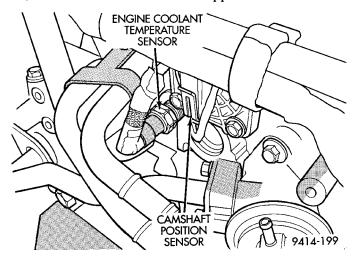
Engine Coolant Temperature Sensor—SOHC
